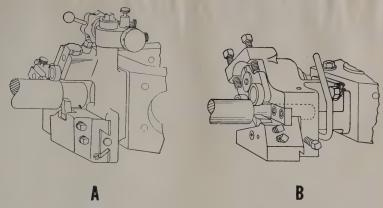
A. Universal bar turner. B. Single bar turner.
